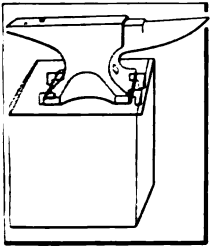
Usual type of anvil mounted on heavy block and clamped tightly to base to reduce vibration to a minimum
